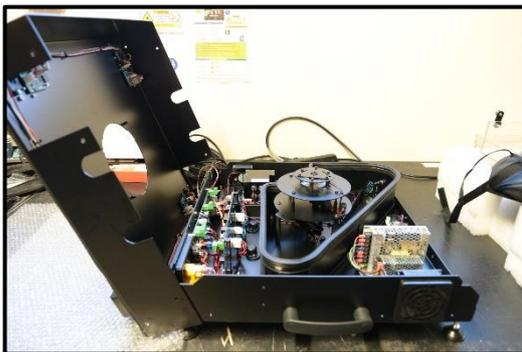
REMOVING THE UPPER PART (2/3)
